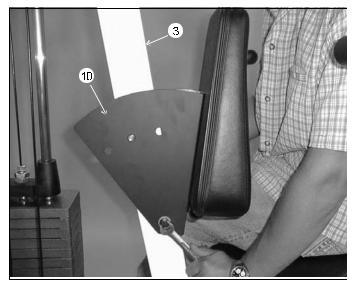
Secure the Back Pad Bracket (#10) to the Front Upright (#3) using one Hex Head Cap Screw 3/8-16 X 3 1/4 (#76), four Flat Washers Nylon 3/8 (#6), two Flat Washers SAE 3/8 (#90) and one Nylon Insert Jam Lock Nut 3/8-16 (#86). Refer to the Exploded View on page 19 for further clarification of this assembly.
